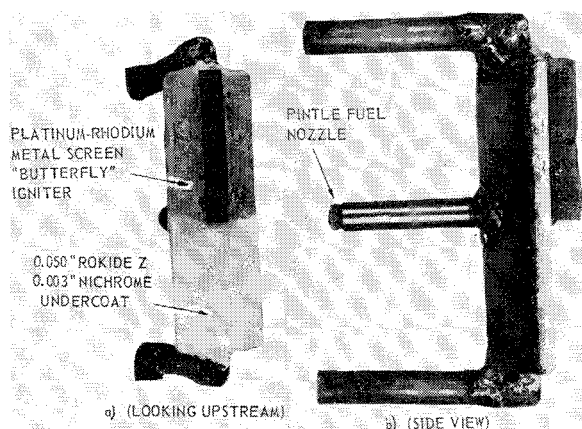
Two views of fuel cooled gutter, with aft surface coated with Rokide Z, showing "butterfly" igniter attached.
